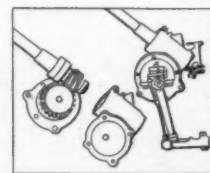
Worm and gear of the steering system showing the housing and the assembly of the set
